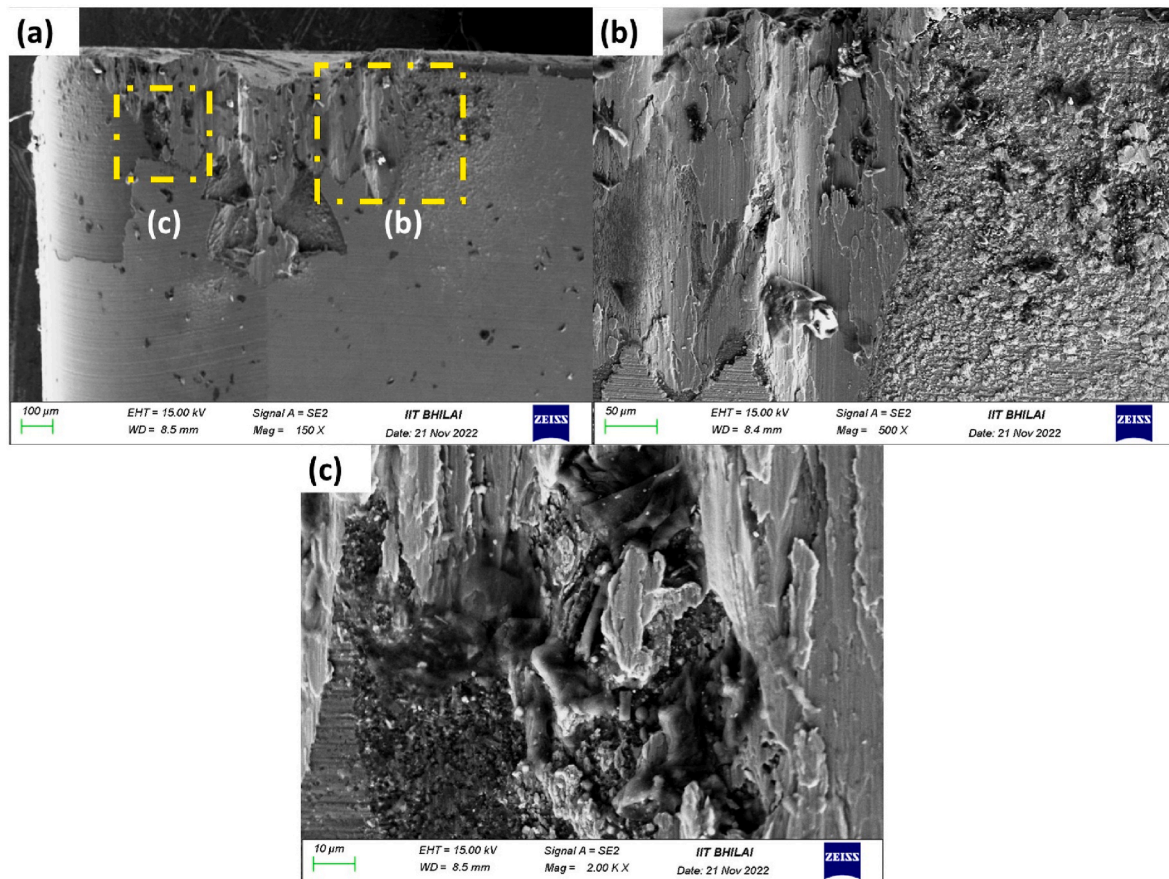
SEM micrographs of wear on the flank surface of TiSiVN coated  $\text{Al}_2\text{O}_3\text{-SiC}$  cutting tool after machining at 75 m/min cutting speed.
